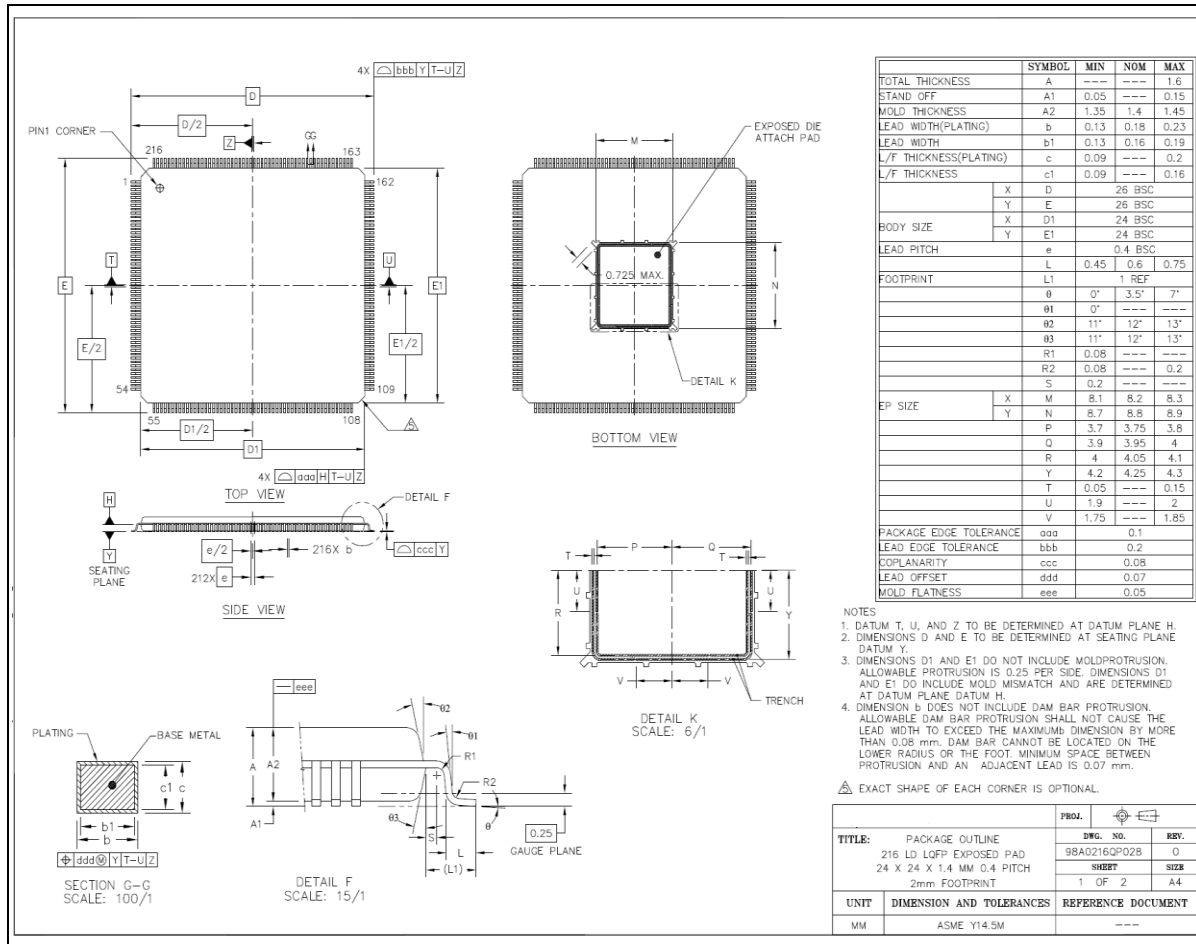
LQFP-EP 216-Pin Package Dimension
